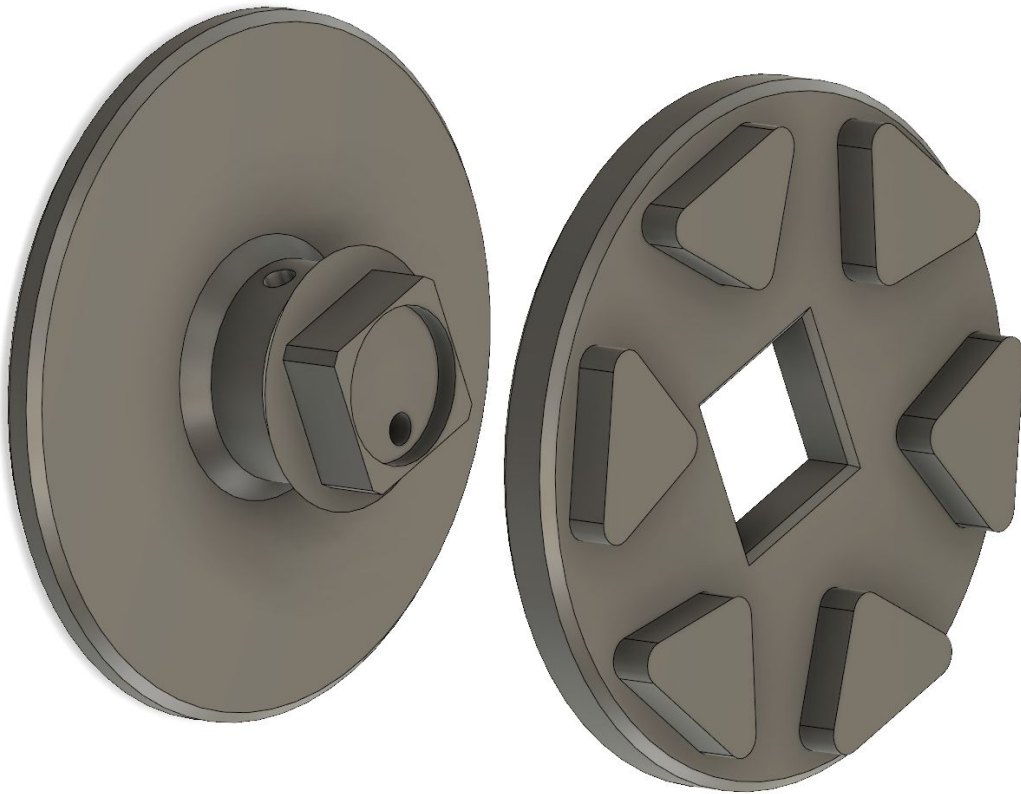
CAD assembly of spool with integrated servo-encoder coupler
